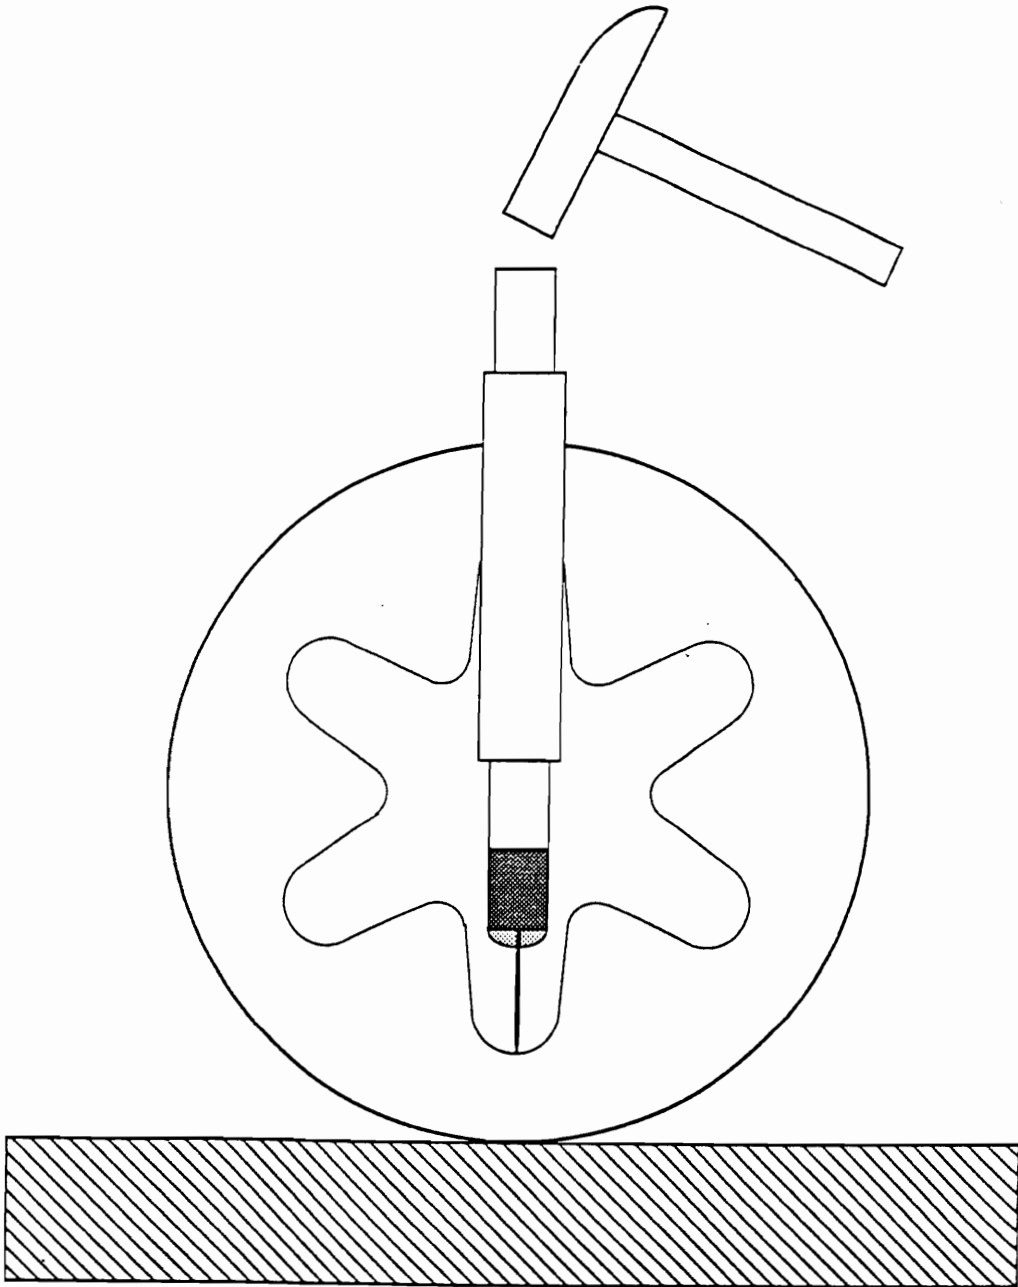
Fixtures for making a symmetric crack.
